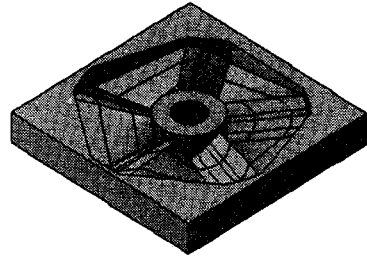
Definition of parting surfaces using upper surfaces and boundaries of blade surfaces
